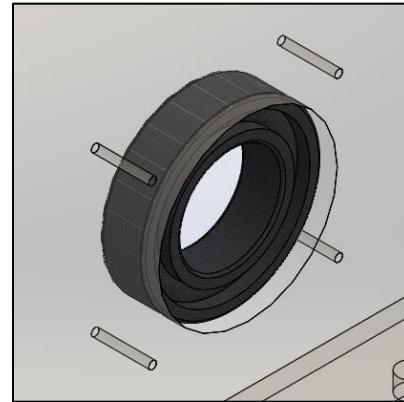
Bearing Held in Place in The Main Casing of The Hoist
